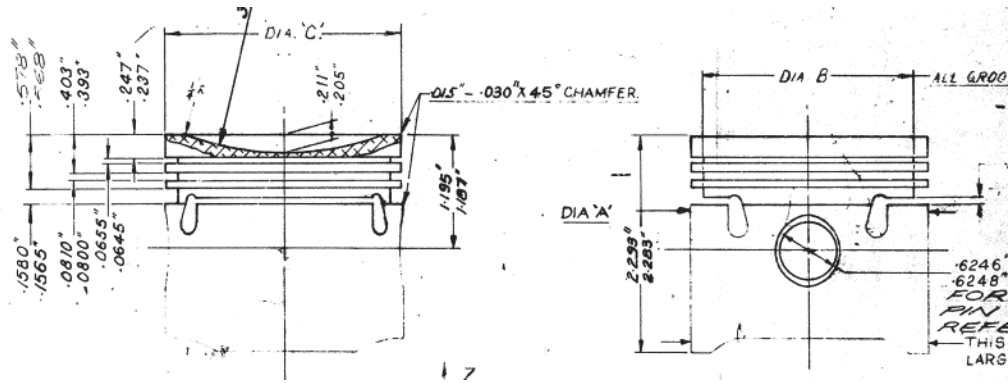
Piston – standard size shown AYG297.
